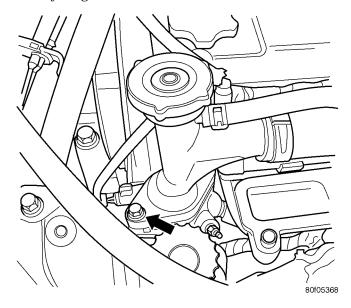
THERMOSTAT HOUSING - 2.4L TURBO
